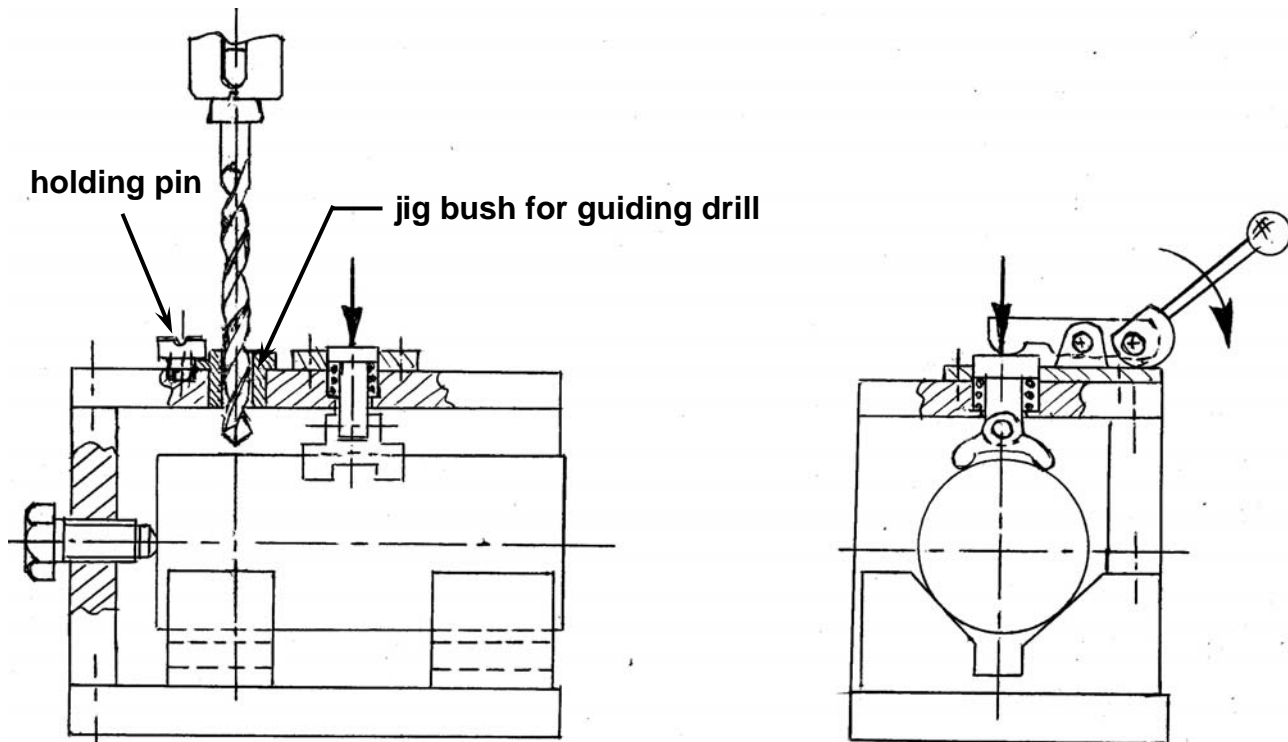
(e) Jig bushing for tool(drill) guidance
